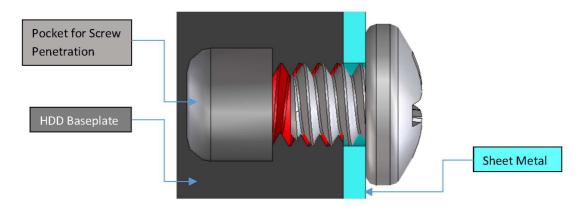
Option 2 – Side mount hole, 6-32UNC X 1/8" (2.8 threads engagement)
